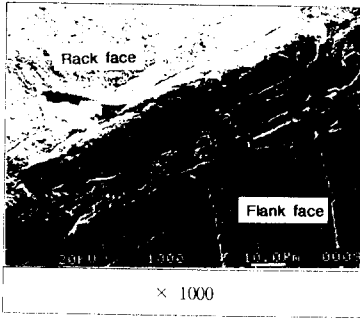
Thermal and fatigue crack of coated carbide ball-end-mill
